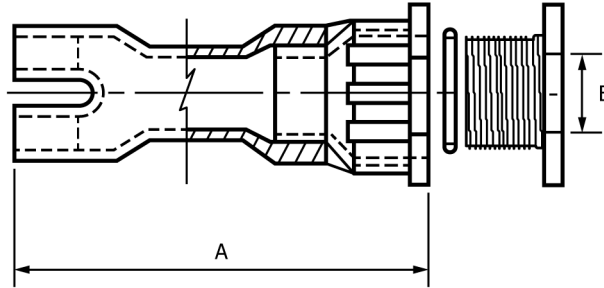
Type I-Multi-Legged Standard Cable Entry Seals
